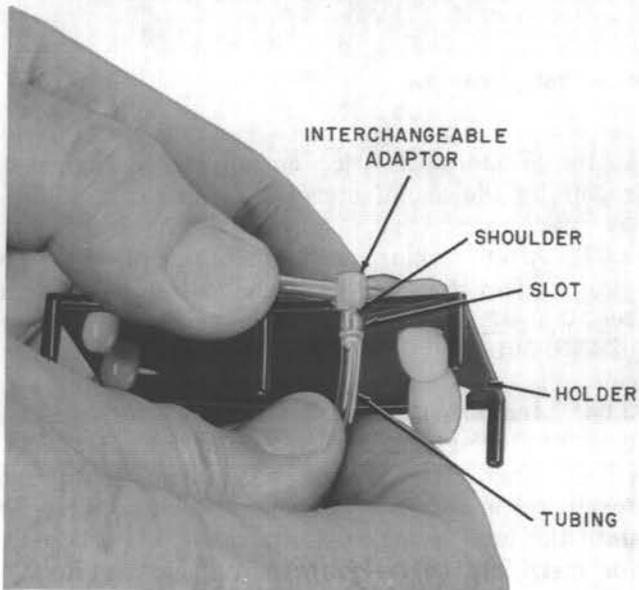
Adaptor in Holder Slot for Removal of Earpiece Assembly
